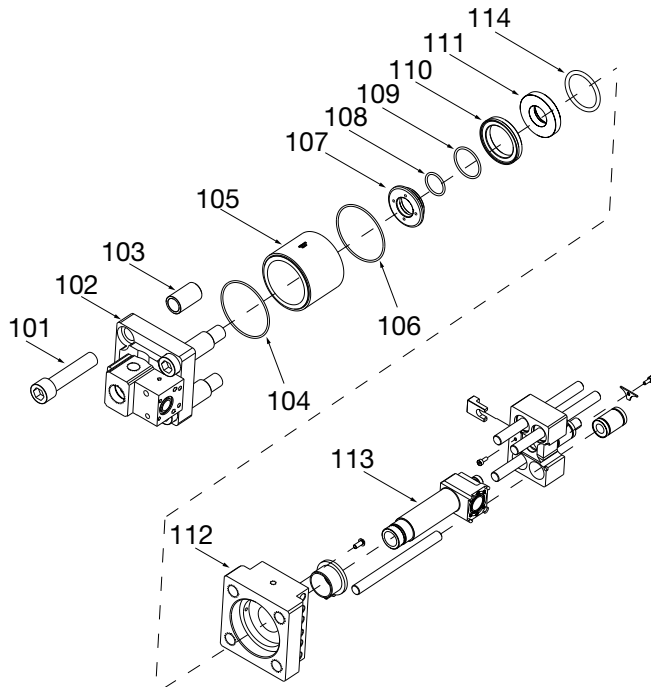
Disassemble Cylinder of 50 cc and 100 cc
